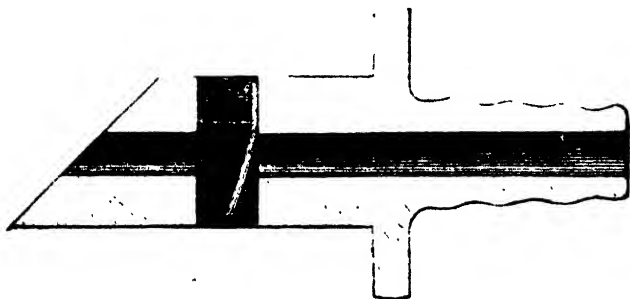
Longitudinal Section of Simple Air Pump. FIG. 90.—Valve Casing Partly in Section
